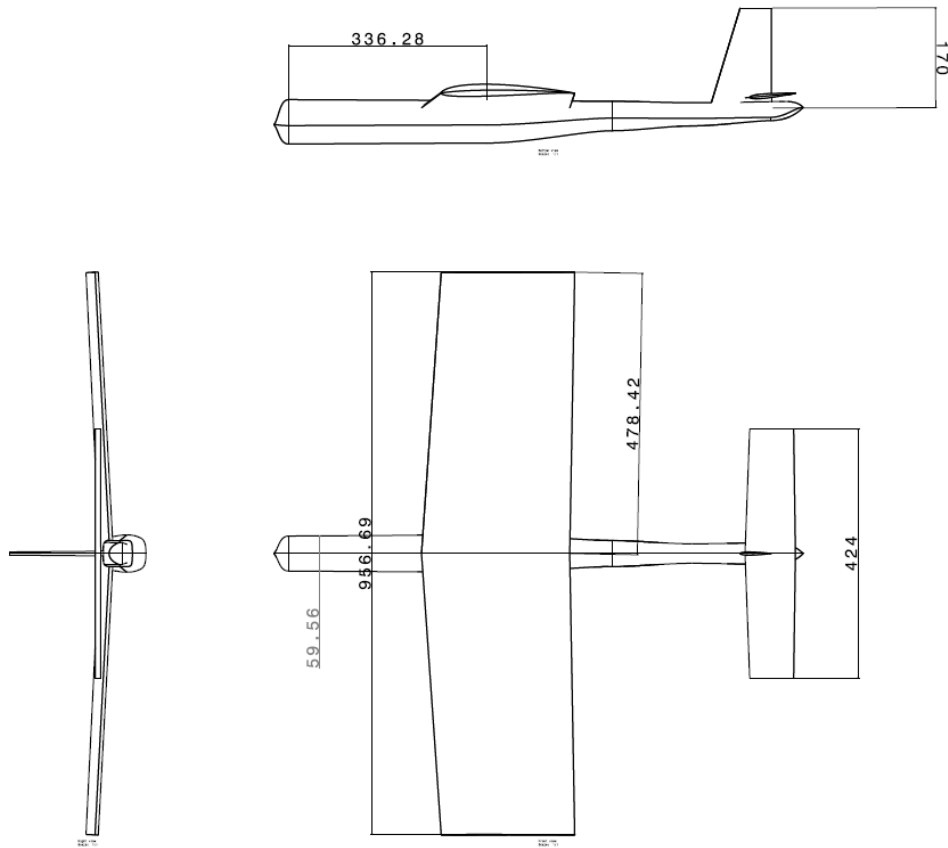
10: Detailed design of the Mini UAV(dimension in mm)
